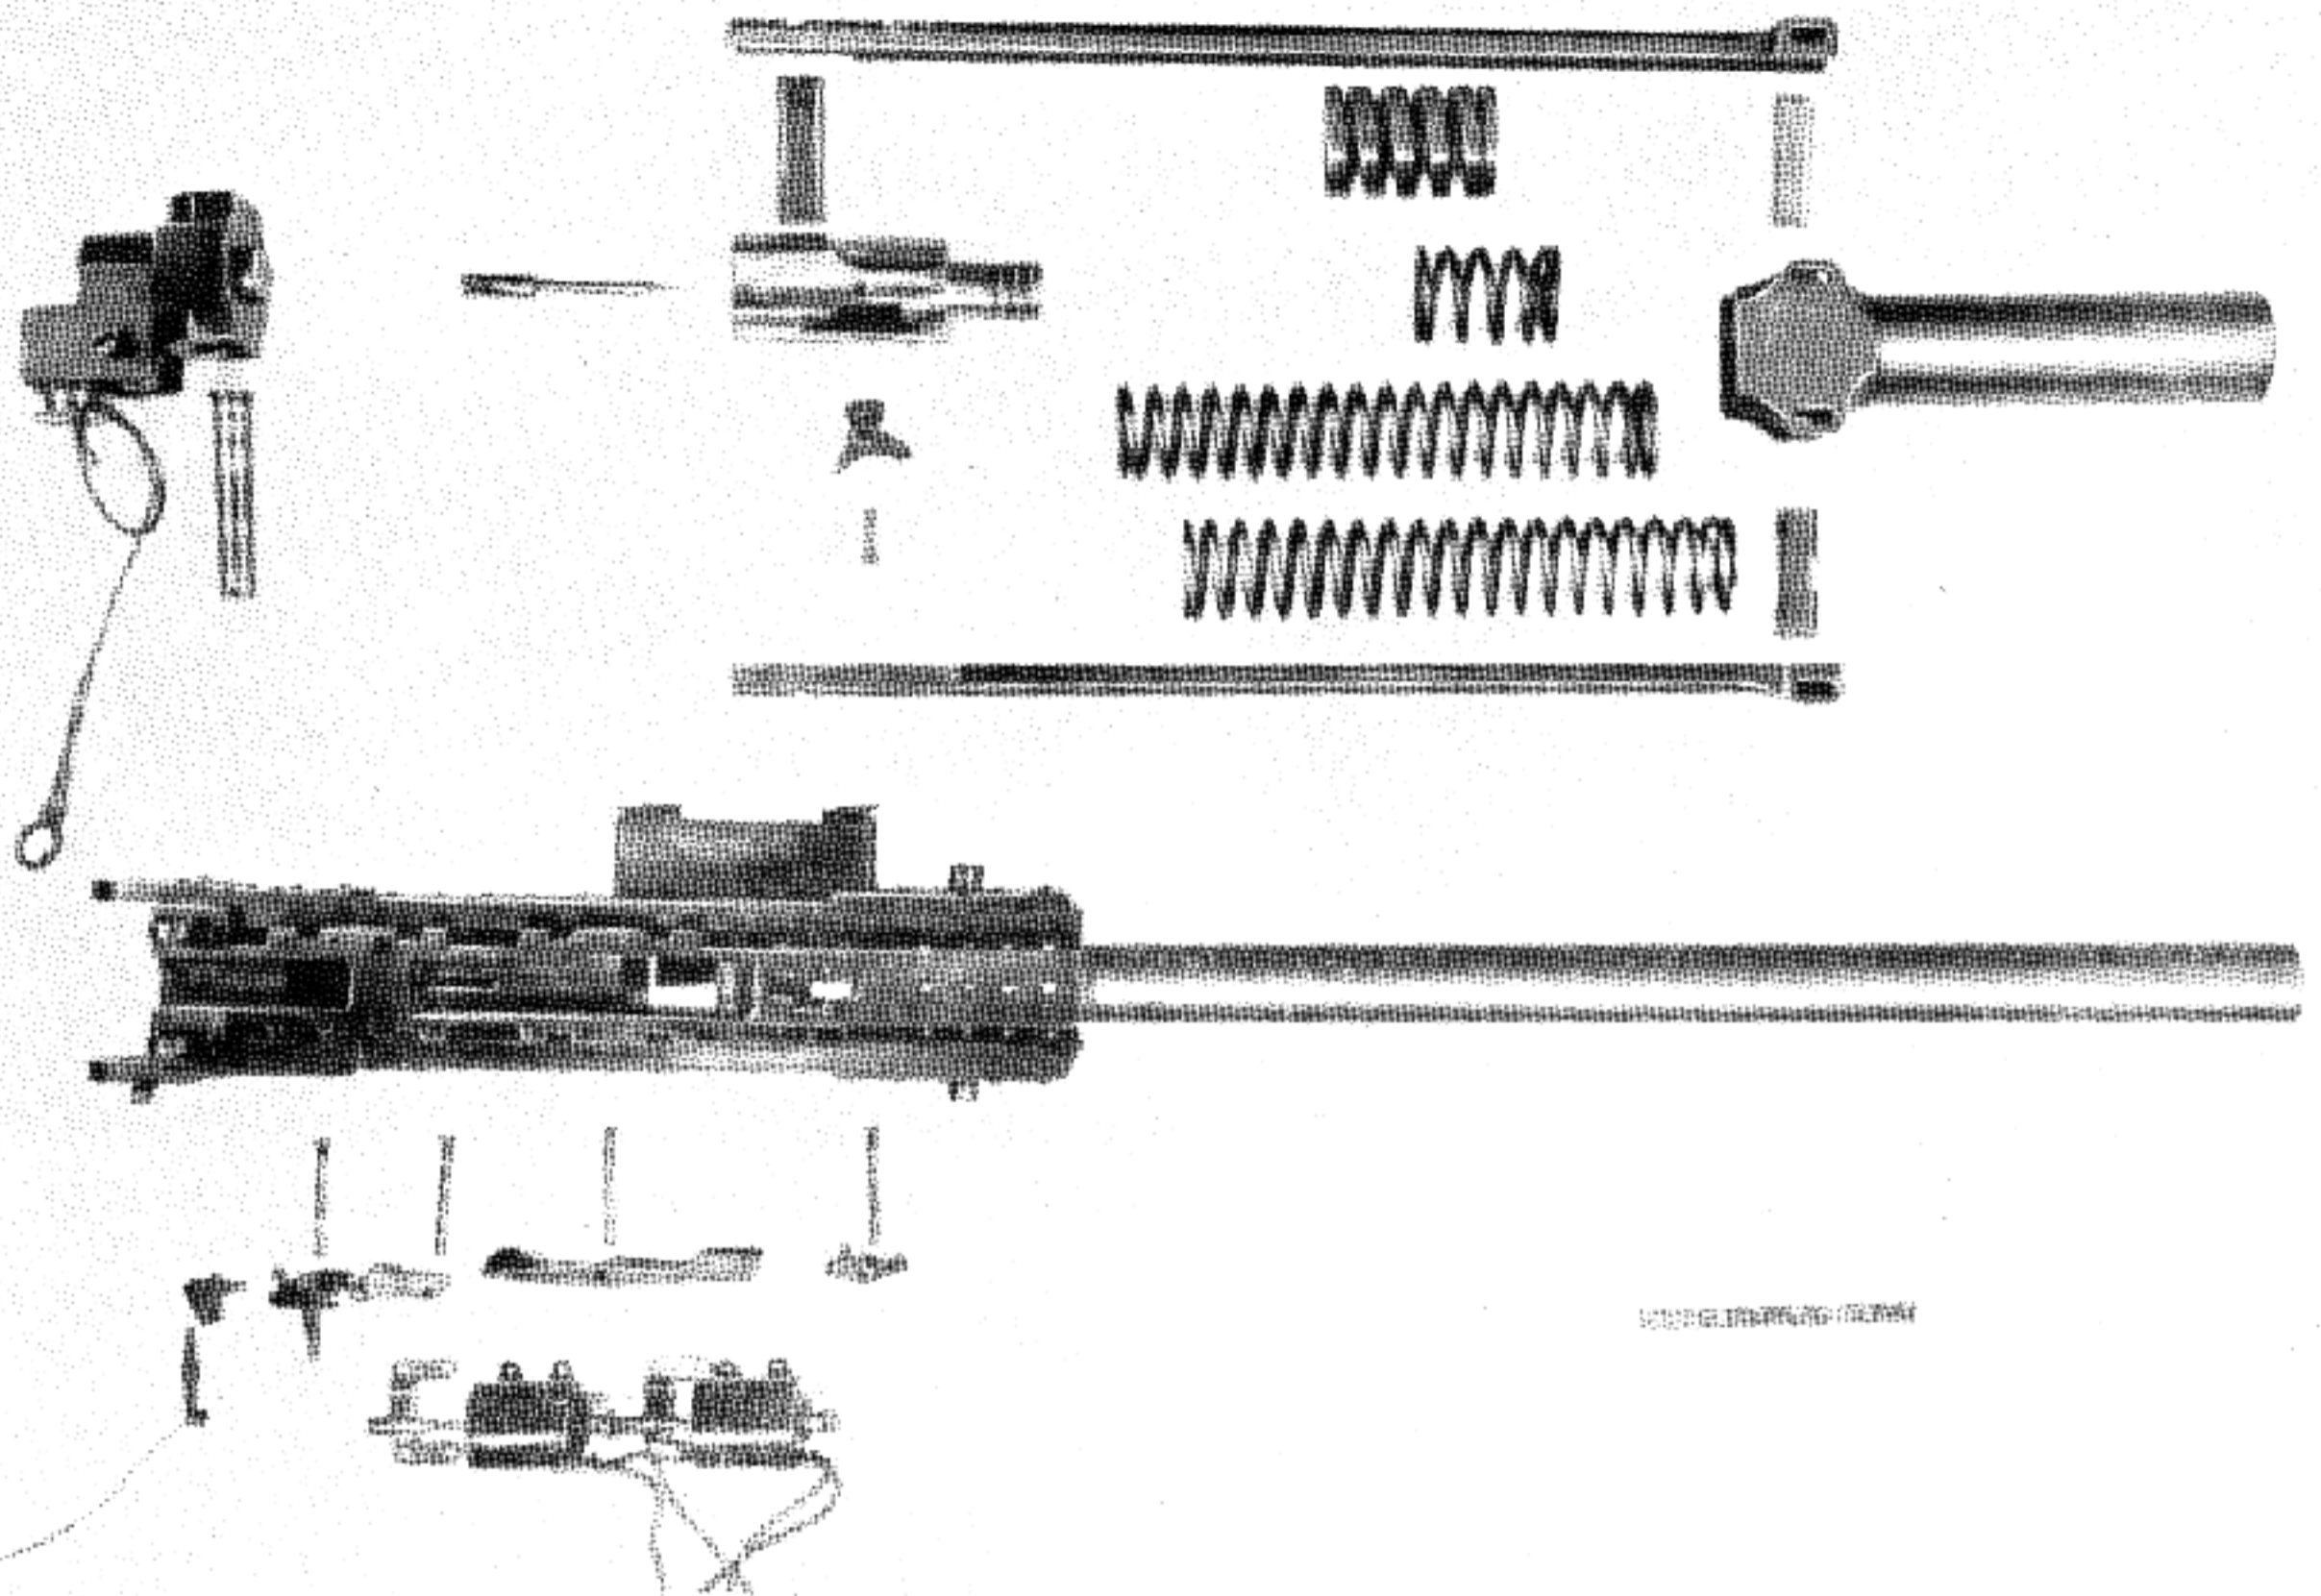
Japanese Caseless 40-mm HO-301. Disassembly of gun.
